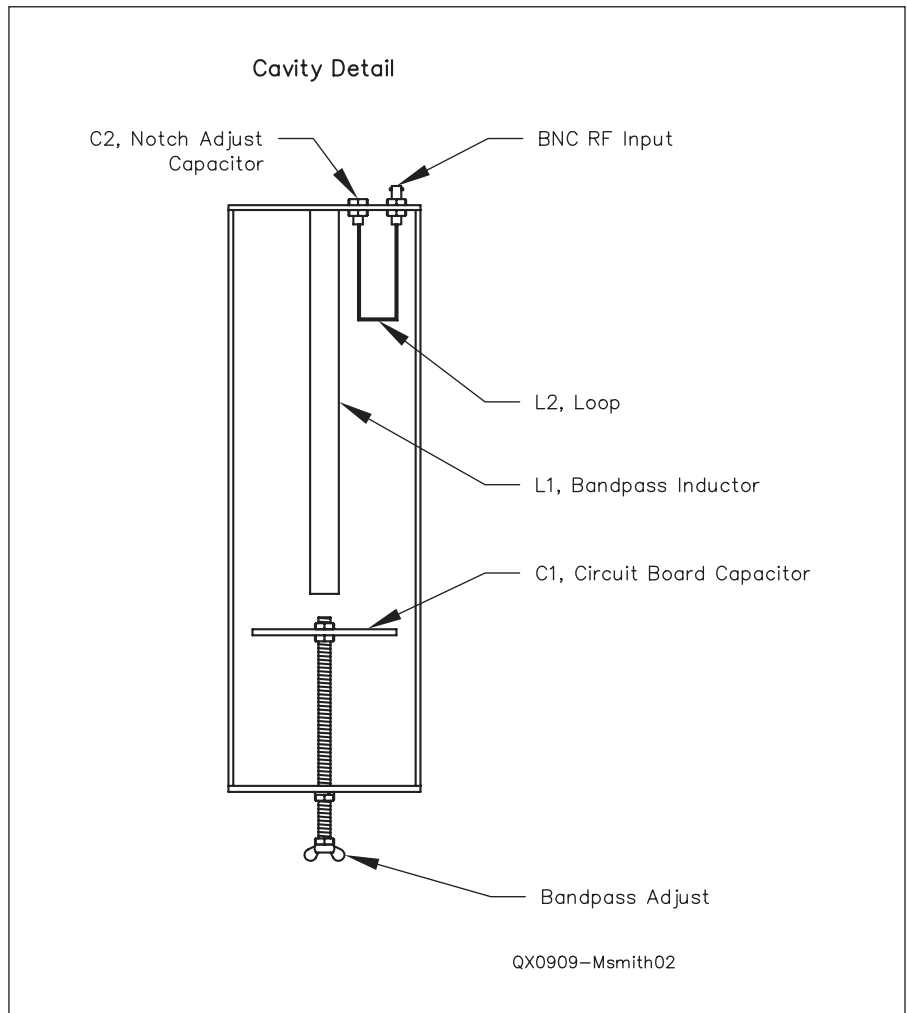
This drawing shows the internal workings of a duplexer cavity.
